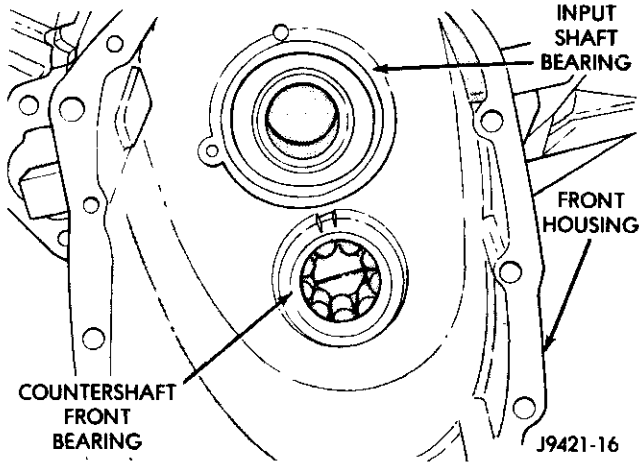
Input Shaft And Countershaft Front Bearing Location
